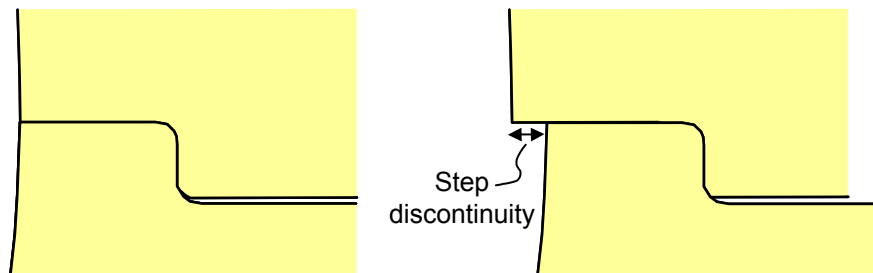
Enlarged views of the step joint illustrating a smooth inner surface of the ablator (left) and an ablator inner surface containing a step discontinuity (right)
